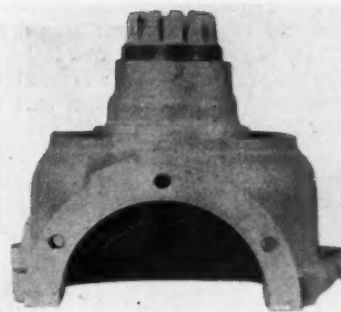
Showing One-half of Differential Housing and Member Used When Adjusting Pinion and Ring Gear of Live Axle; the Lock Plate in Pinion Flange Housing Meshes With Slot in Bearing Adjusting Member, Preventing Its Turning.
